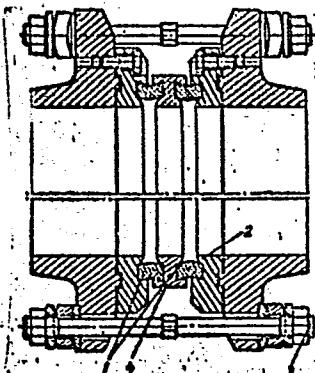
1 - elastic rubber elements; 2 - flange; 3 - coupling; 4 - floating ring.
